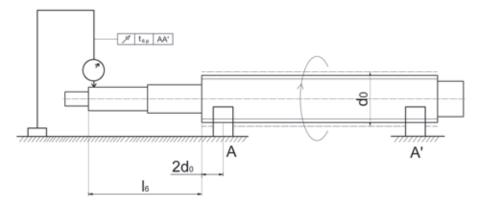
Measurement of the concentricity deviation $t_{6.1}$ of the bearing seat
